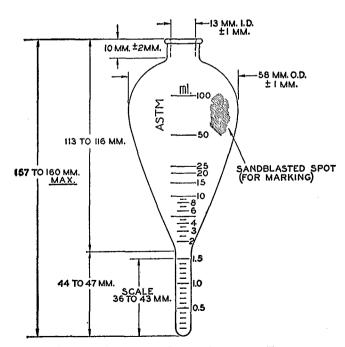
ASTM PEAR-SHAPED CENTRIFUGE TUBE
